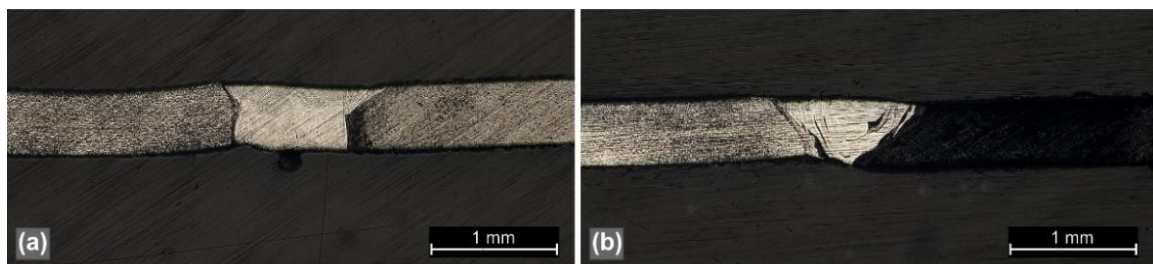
Macro image of the weld bead cross-section; a) reference sample, b) sample obtained with the addition of SiO_2 flux [STA19].
